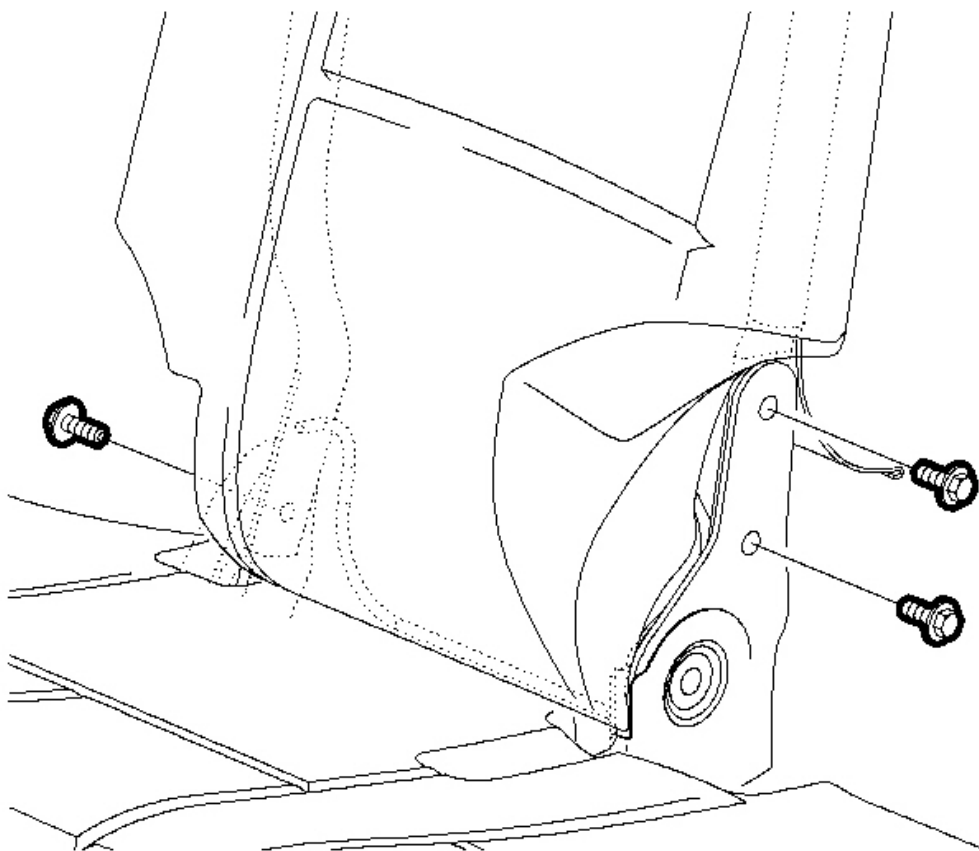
Removing/Installing Inboard Seat Back Bolts
